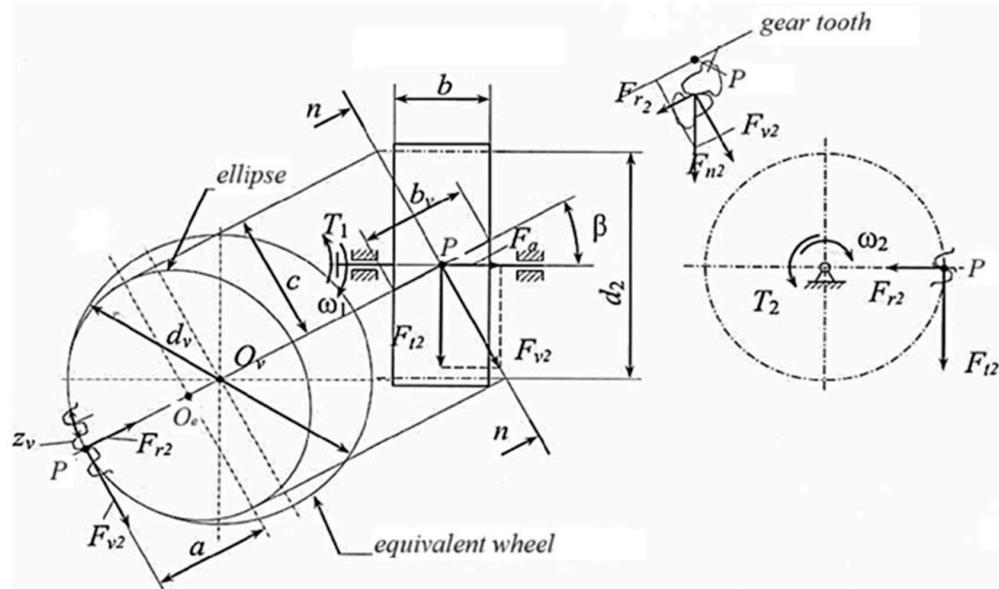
Calculation scheme for calculation of active surfaces of helical gear wheel teeth on resistance to contact fatigue.
